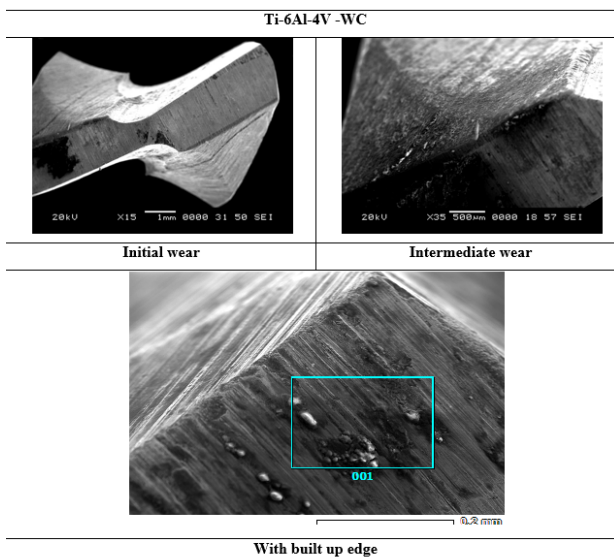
Tool wear mechanisms while Ti-6Al-4V drilled with tungsten carbide drill
